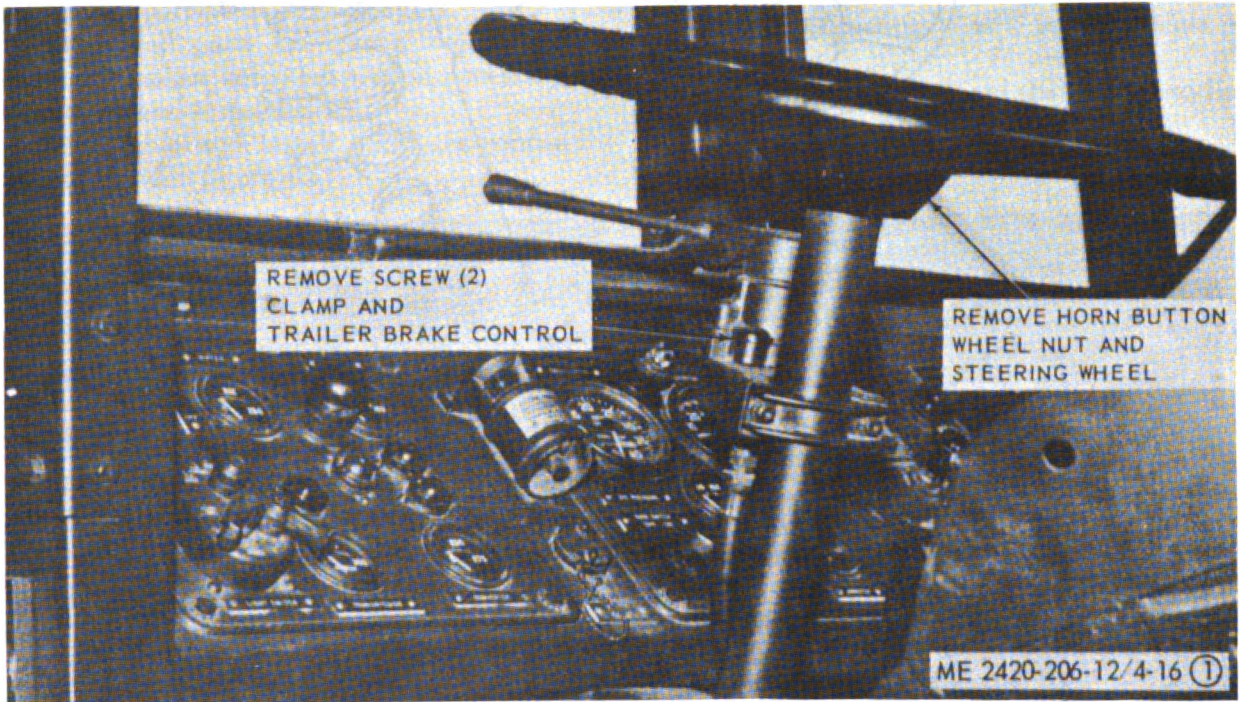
Steering wheel, trailer brake control, removal and installation. (sheet 1 of 2).
